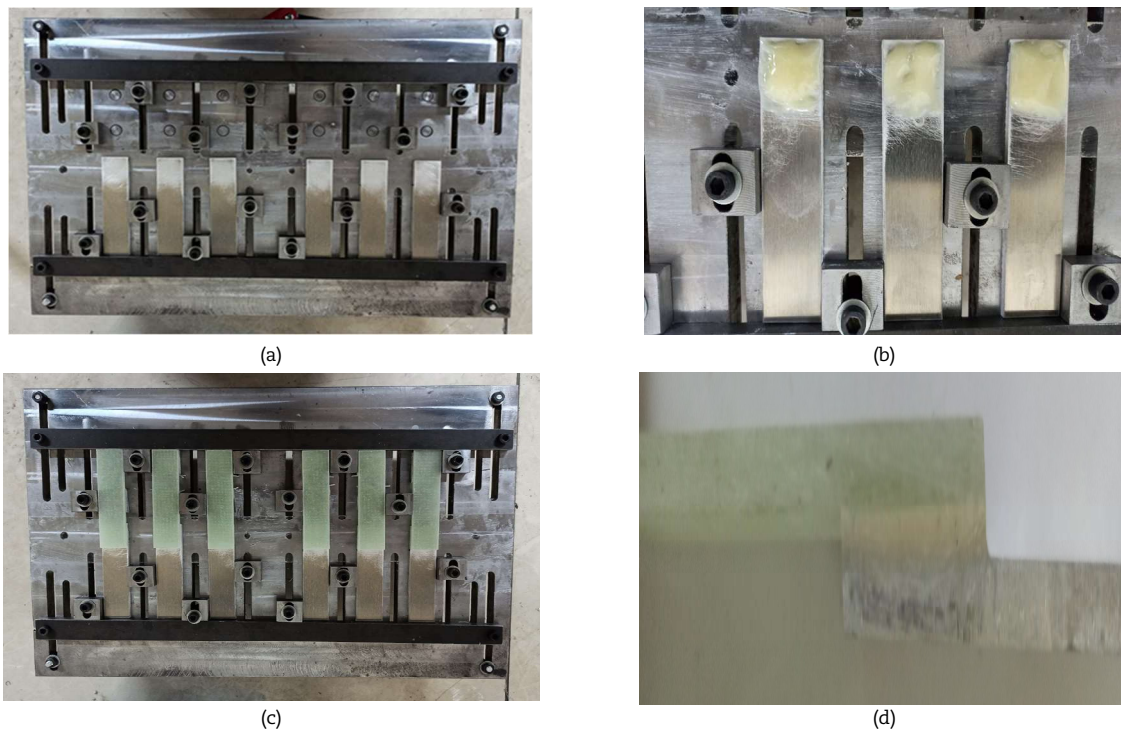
(a) Fixture of joints; (b) Applied adhesive onto the aluminum; (c) Positioning of the composite onto the aluminum; (d) Single-lap joint with a mono adhesive.
